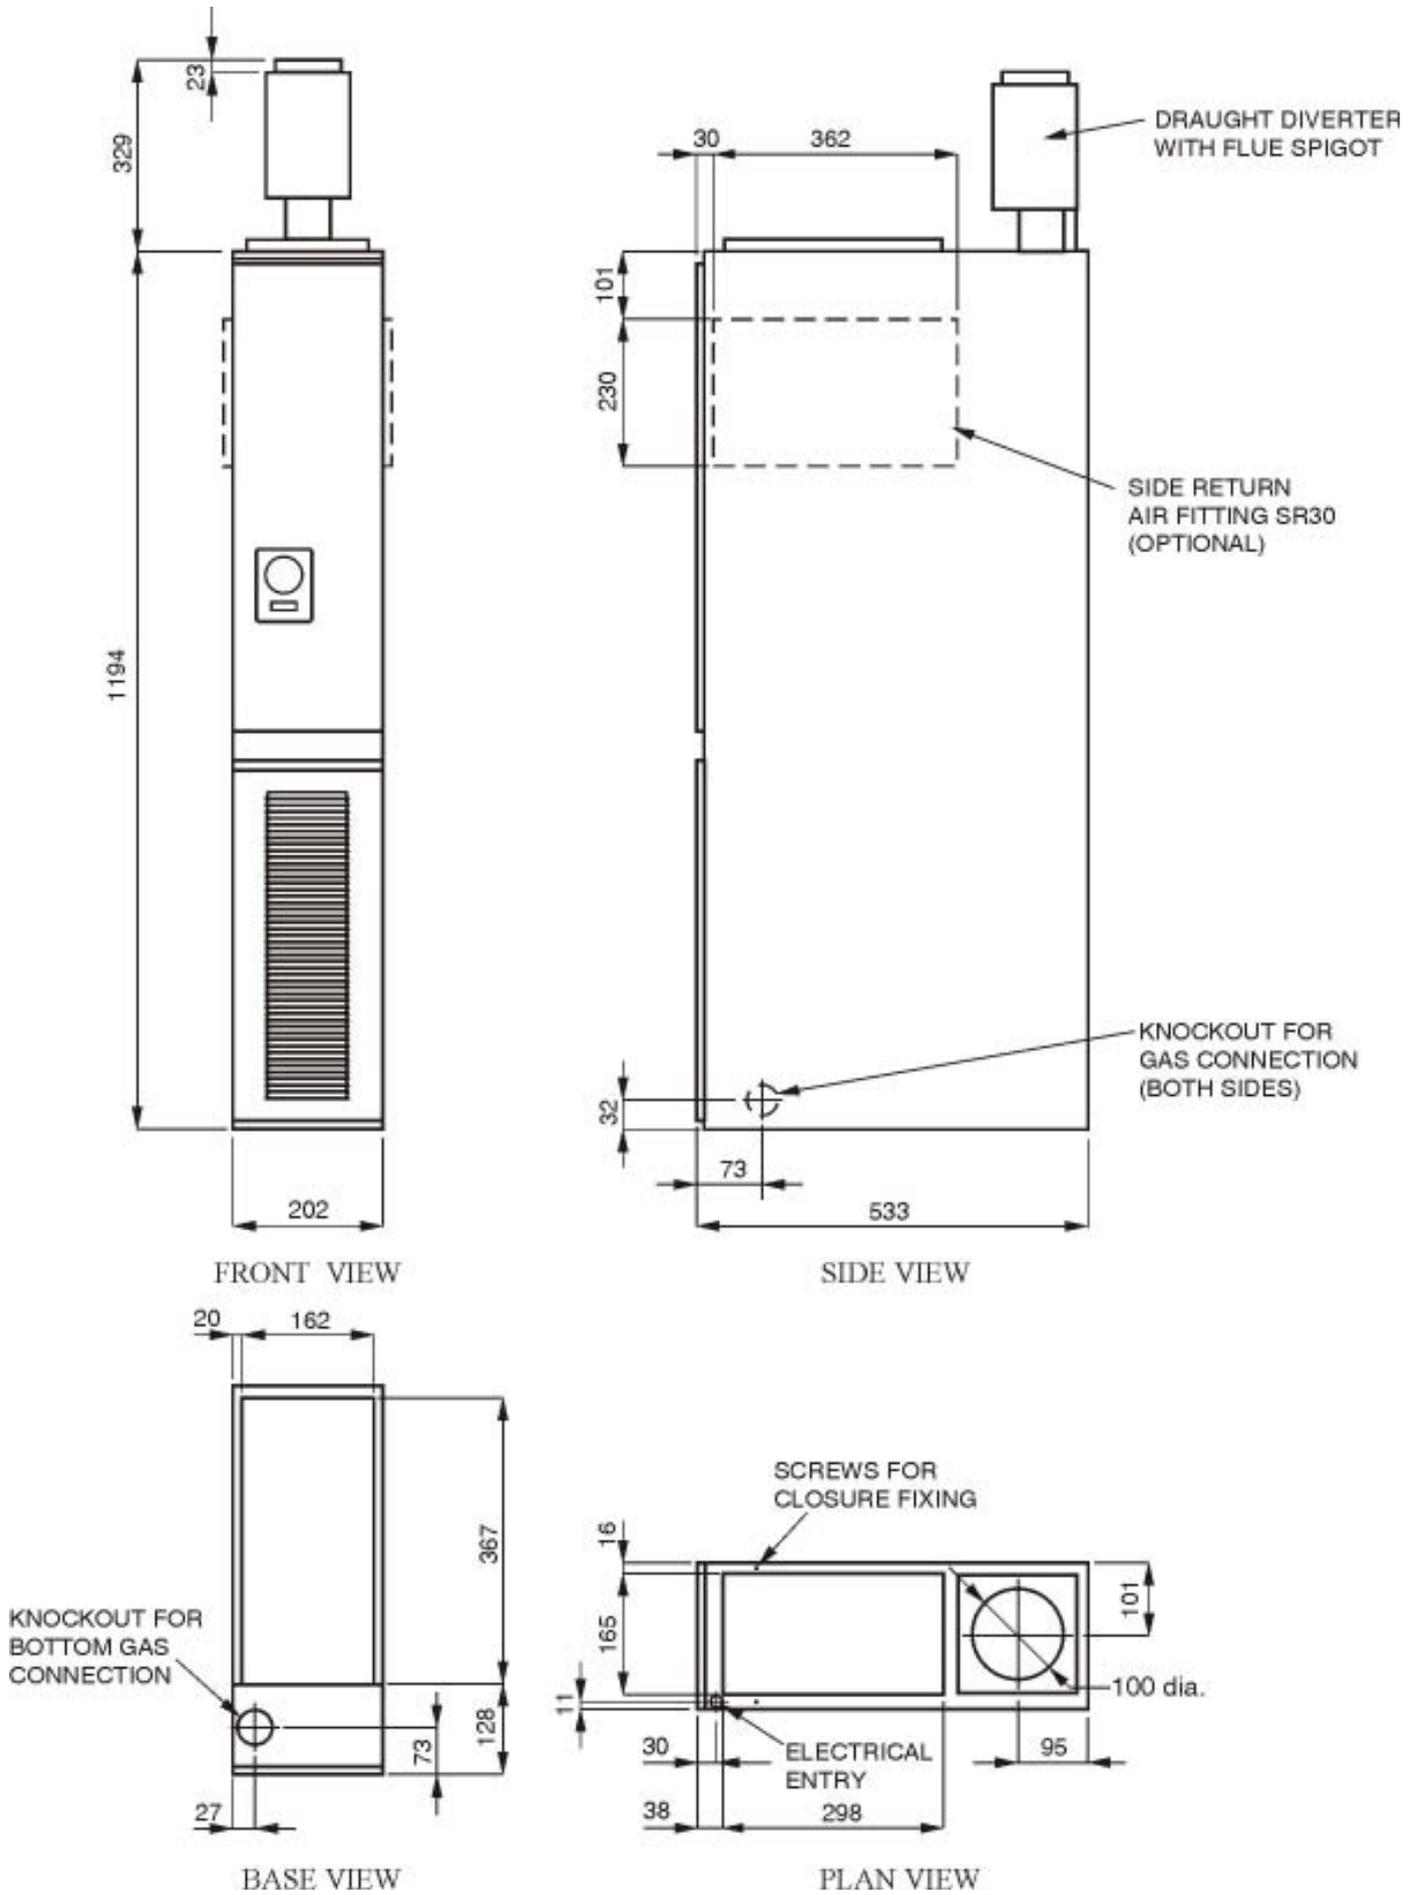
, PRINCIPAL DIMENSIONS (mm)
